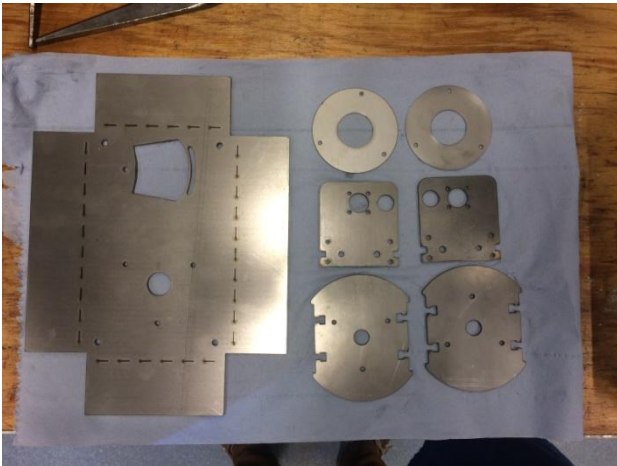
freshly laser cut parts. the base plate, angular contact bearing holders, shoulder plates, and shoulder base plate.
